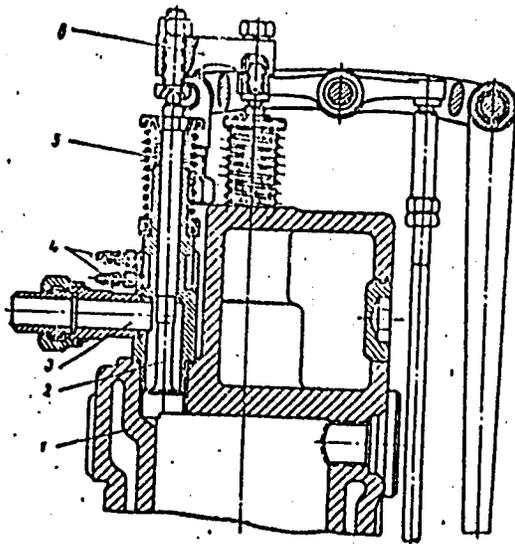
Scheme of the soot-collecting valve setup in the cylinder head of the engine MT 9-2 (IT 9-2); 1 - cylinder head; 2 - soot-collecting valve; 3 - outlet of exhaust gases; 4 - coolant supply to the valve sleeve; 5 - valve spring; 6 - valve drive.
